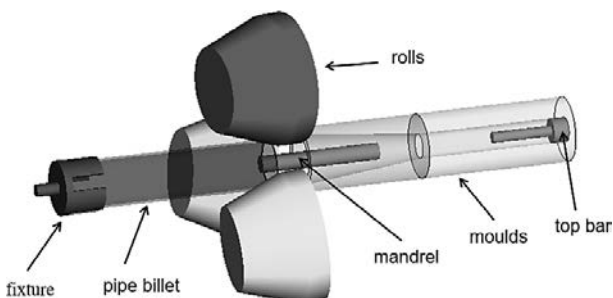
Geometrical model of three-roll slant rolling and extrusion thickening forming
